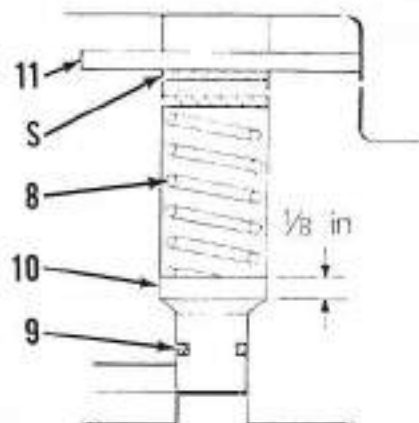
Cross-section of pressure relief valve. Latest type has 1/8-inch head as shown. Shims are located as indicated. Refer to Fig. 120 for legend.
